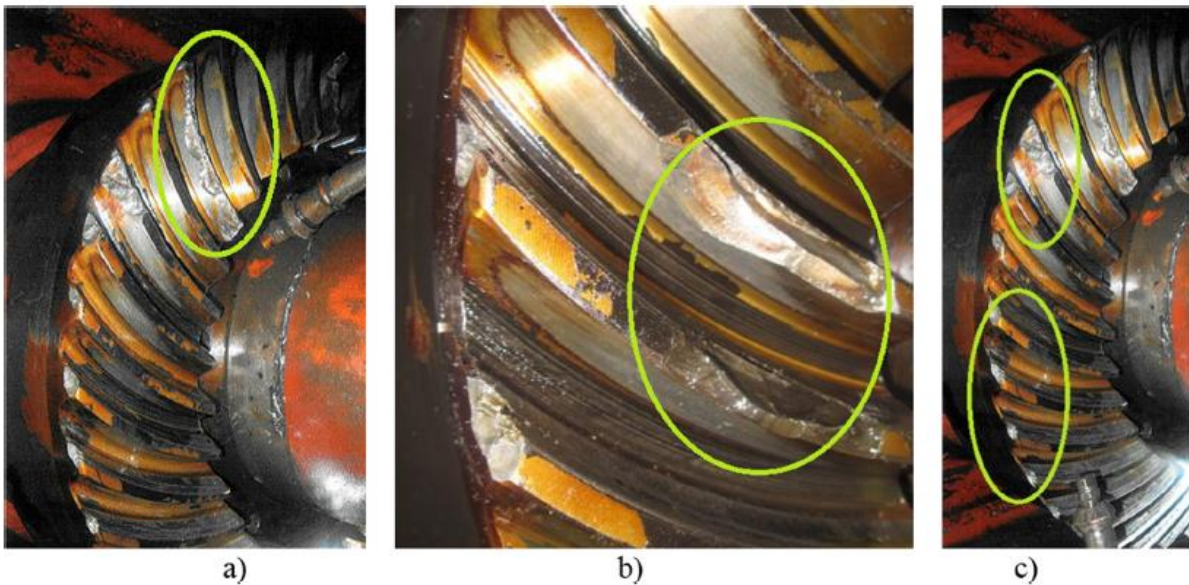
Damage to bevel gear gearing a) fracture in the area of the tooth addendum across the width of the tooth, b) fracture in the middle of the width of the gearing, c) fracture of the tooth at the end of the width of the gearing.
